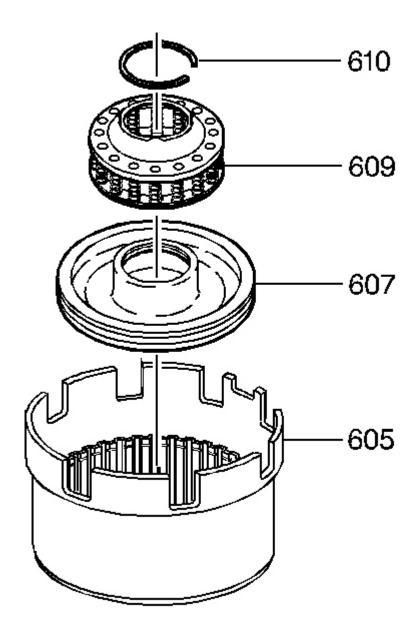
View Of Reverse Input Clutch Spring Retainer Ring Courtesy of GENERAL MOTORS CORP.
